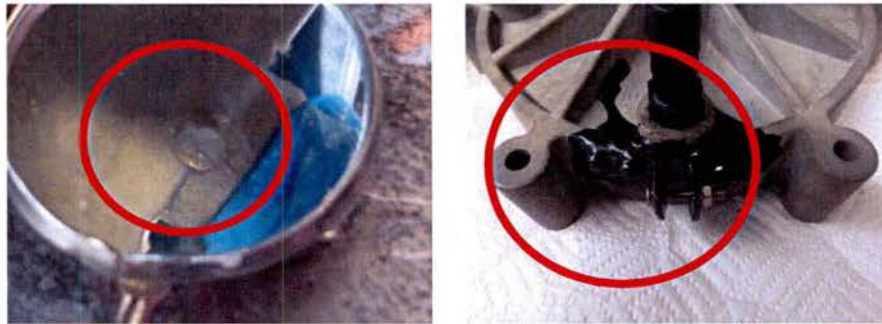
Cracked Coolant Pump (left) and Repaired Housing (right)
